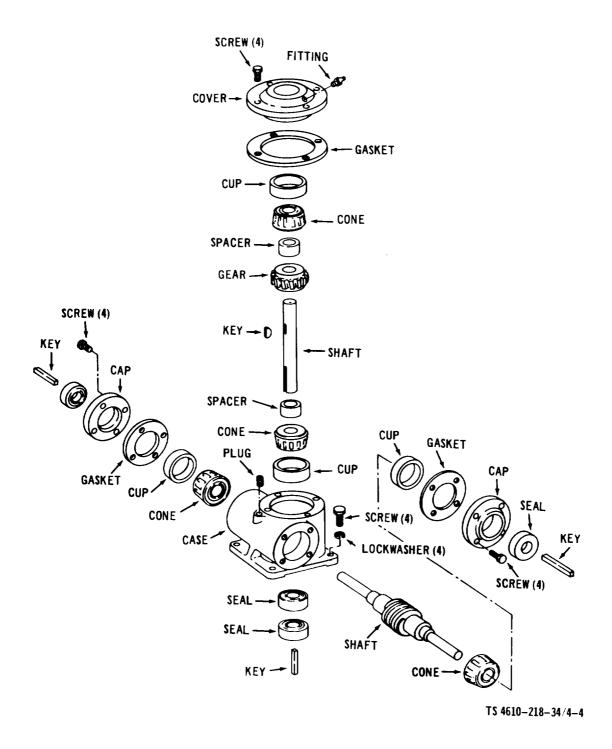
Erdlator Agitator Speed Reducer, Disassembly and Reassembly
